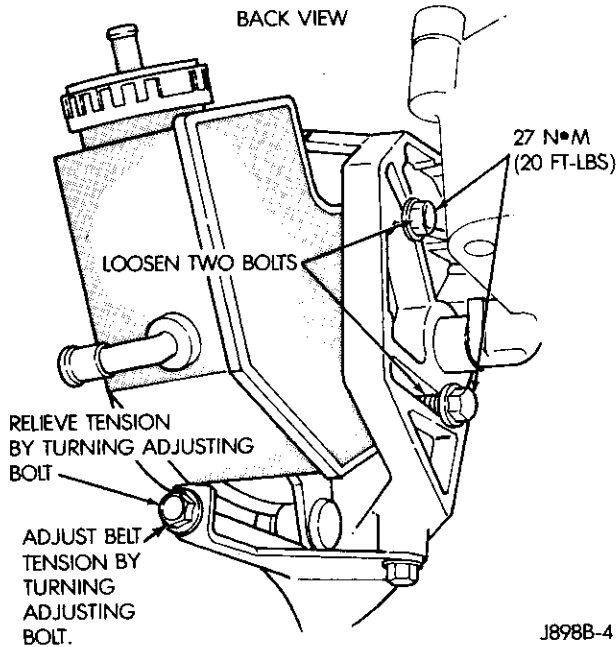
Serpentine Drive Belt Adjustment 2.5L and 4.0L with P.S. — Rear View
